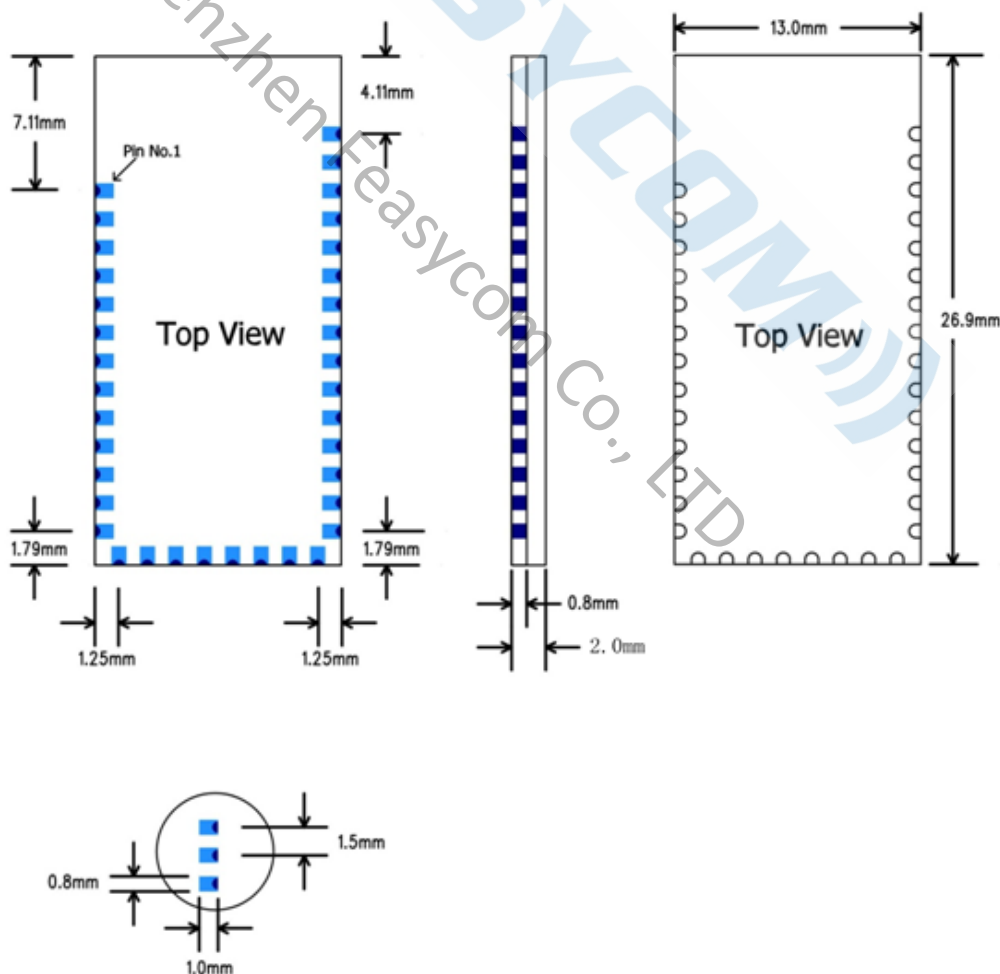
FSC-BW256B footprint Layout Guide (Top View)
